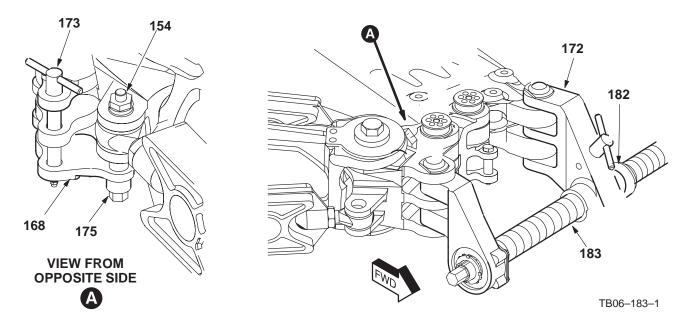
L/H Auxiliary Blade Positioner and Swing Llnk and Blade in Folded Position
